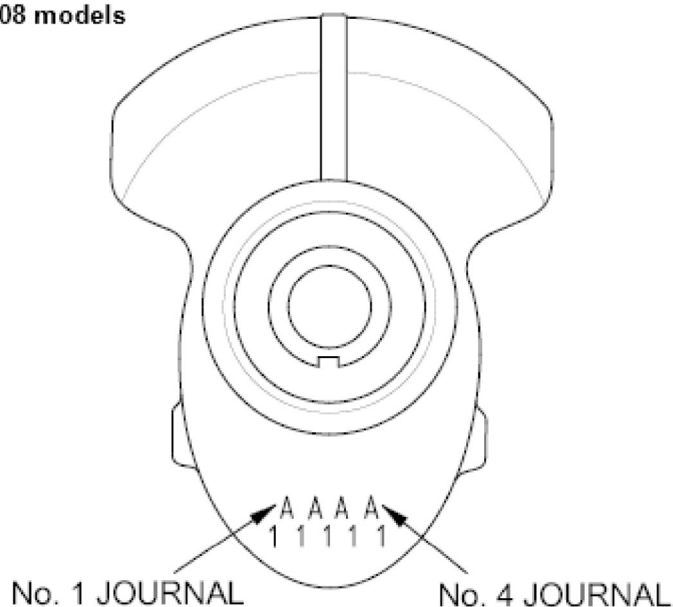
Identifying Connecting Rod Journal Code ('07-08 Models)
